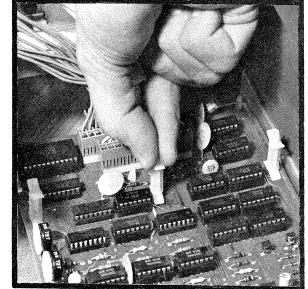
Insert the Supports in the holes on the Playback PC Board.
